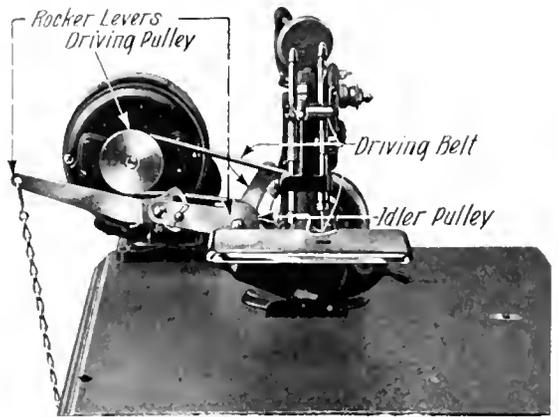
End View of Form K Motor Attached to Low Arm Machine
